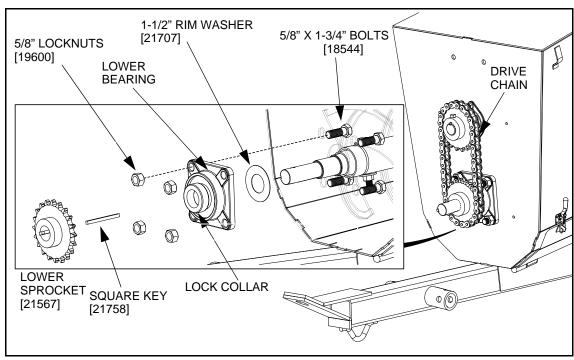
Installing Boot Bearing, Sprocket, and Chain
